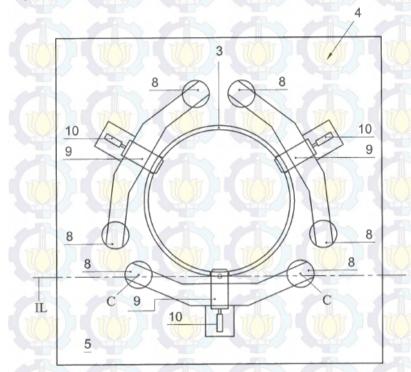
Jack House with Jack System Cross Sectional Top View
